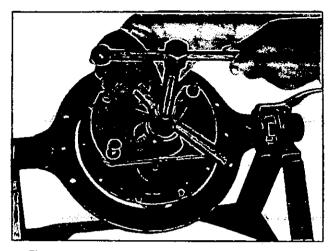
Drive Pinion Front and Rear Bearing Outer Race Replacer
